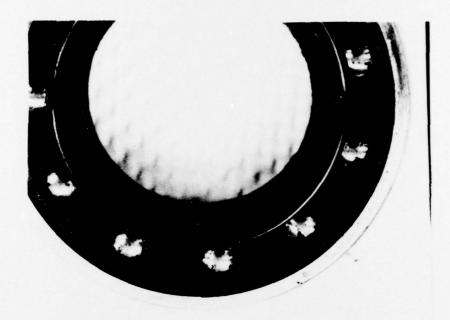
Bearing S/N TRL-33. 2x Enlarged View.
